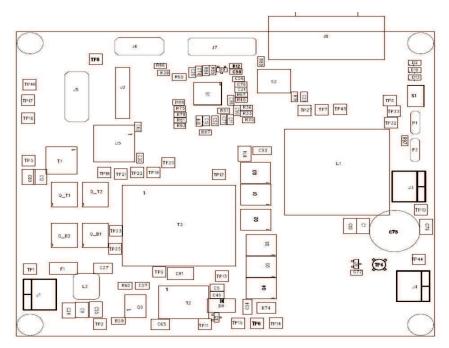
UCD3138HSFBEVM-029 Top Layer Assembly Drawing (top view)
